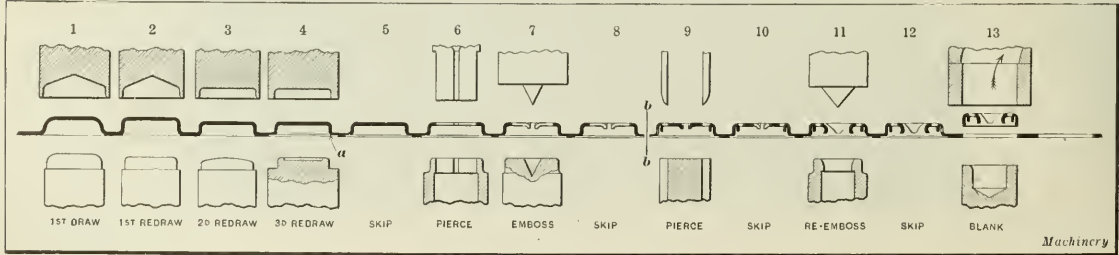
Diagrammatic View of Upper and Lower Set of Tools and Strip, showing Progressive Steps in making Socket
